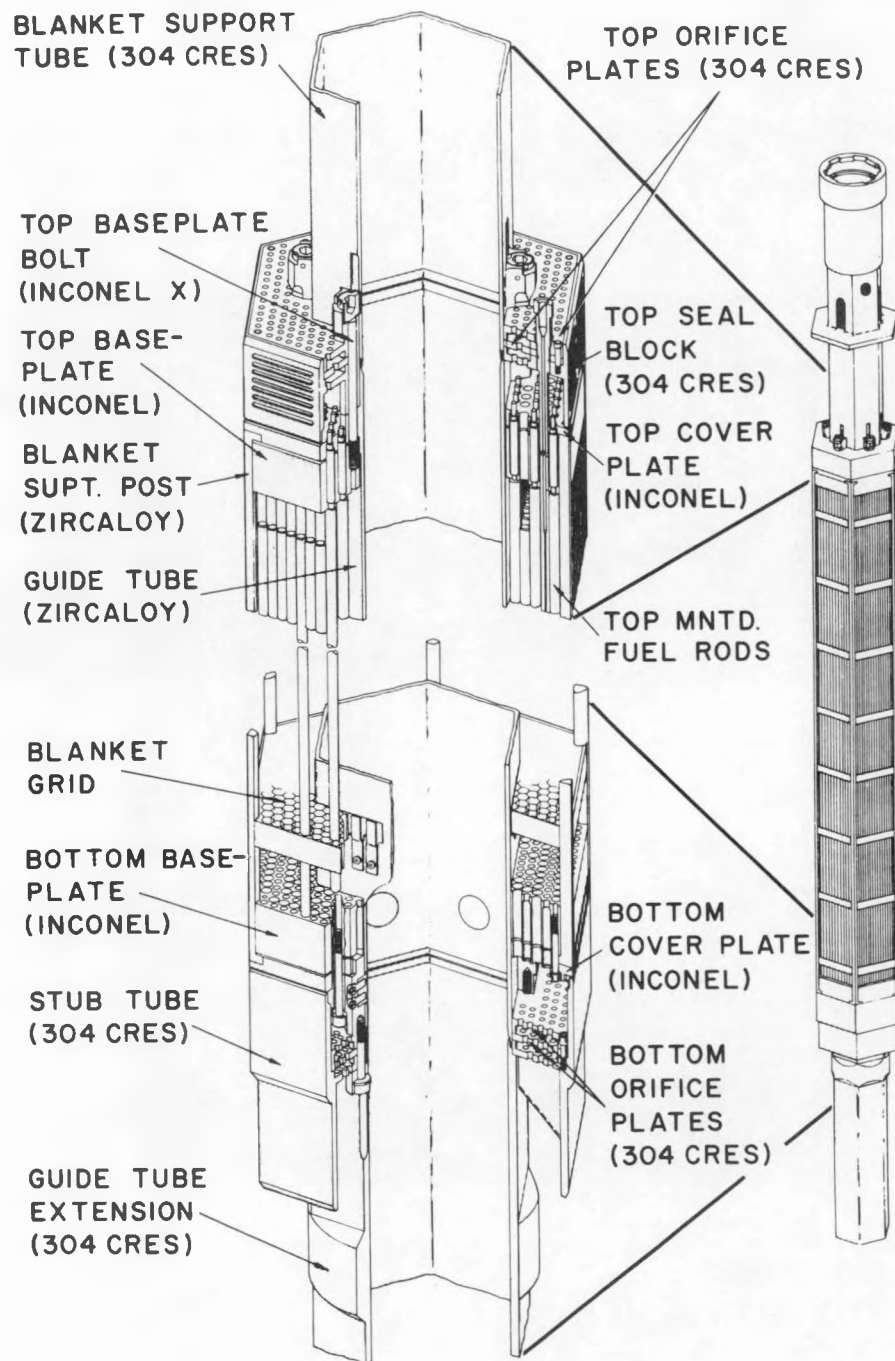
Type I Blanket Module Showing Exposed Grid Structure
